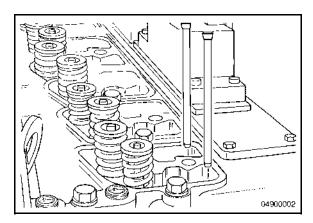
POSITION THE PUSH TUBES INTO THE VALVE TAPPETS
